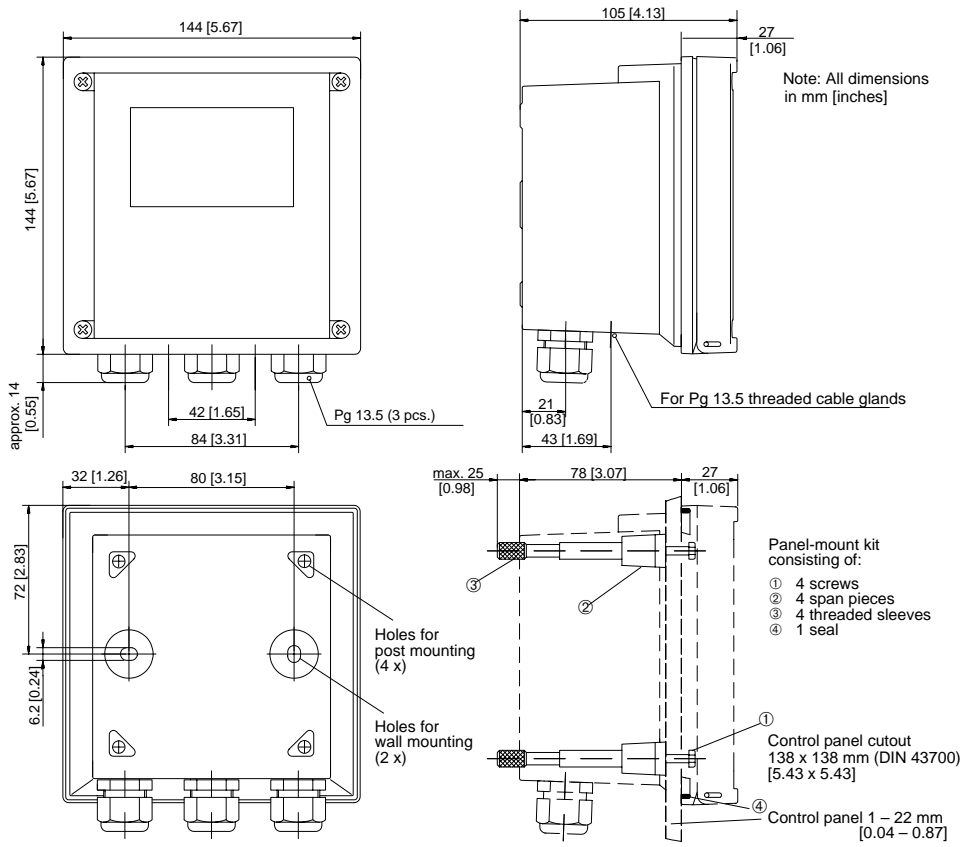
Dimension drawing for Transmitter, mounting diagram and panel-mount kit
